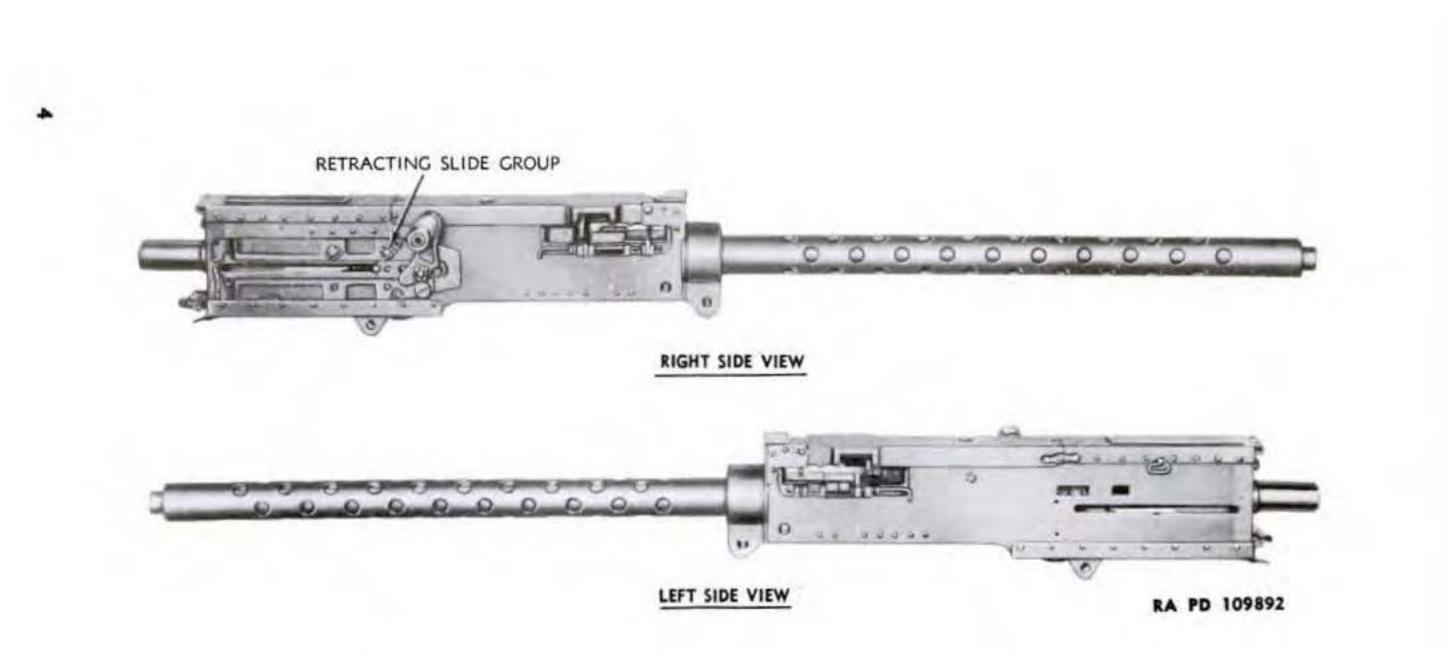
Browning machine gun, cal..50, AN-M2, aircraft, basicwith retracting slide group.
